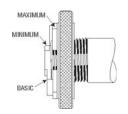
Checking major diameter truncation with 6 step plain ring gage.
